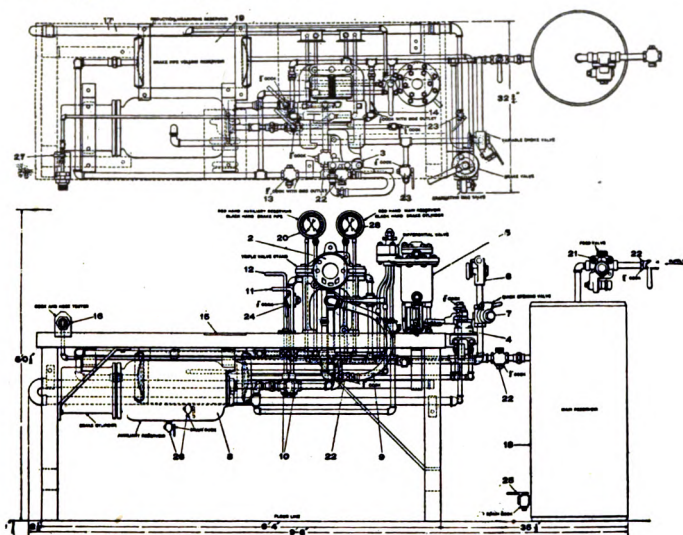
Sketch of Improved Triple Valve Test Rack.
